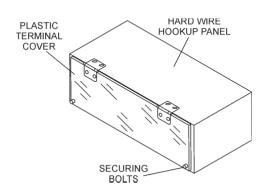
Plastic Face Plate (Output Terminal Lugs)
